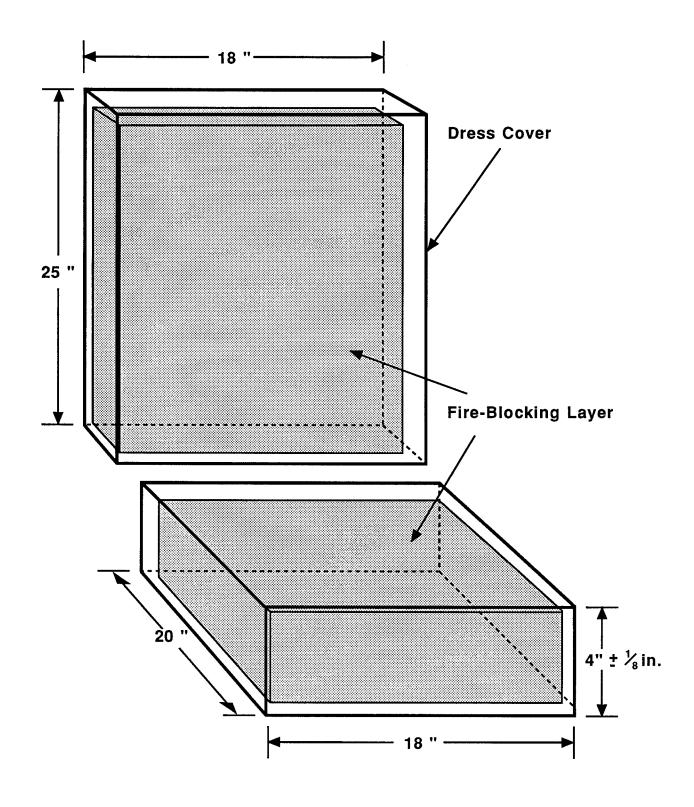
STANDARD SEAT CUSHION SPECIMEN SET READY FOR OIL BURNER TESTING
